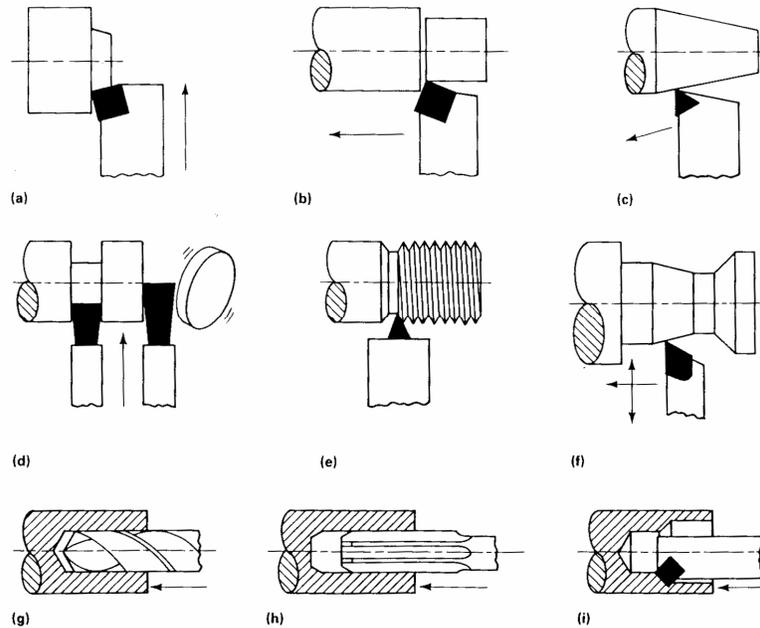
Some Basic operations performed on turning equipment: (a) facing, (b) straight turning, (c) taper turning, (d) grooving and cutoff, (e) threading, (f) tracer turning, (g) drilling, (h) reaming, and (i) boring; cutting tool in black.⁴⁶
